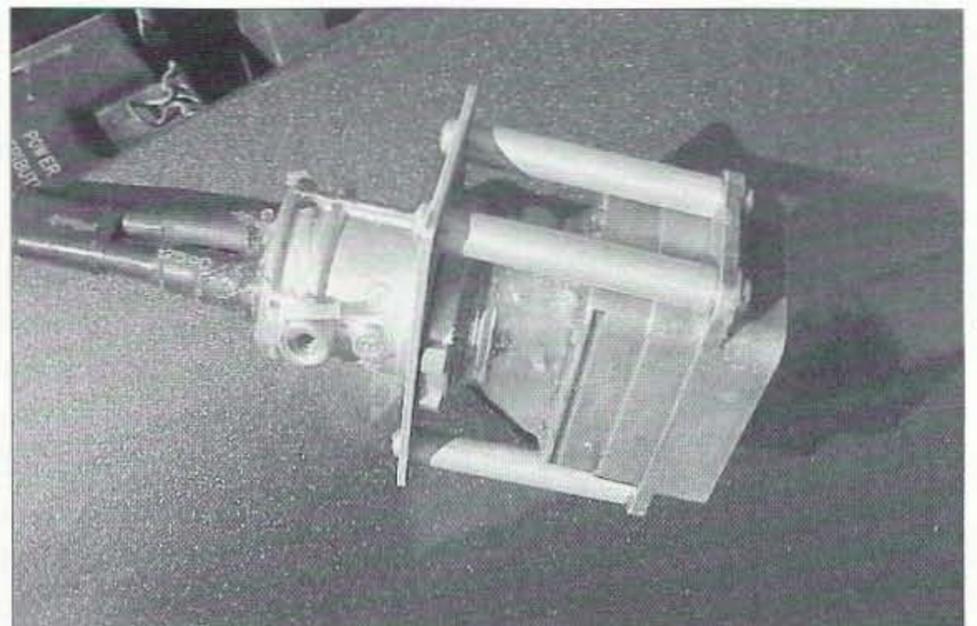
Photo B. Close-up of connector on battery cable. Note homemade backshell consisting of metal stand offs conduit fitting and bathtub sealer.
